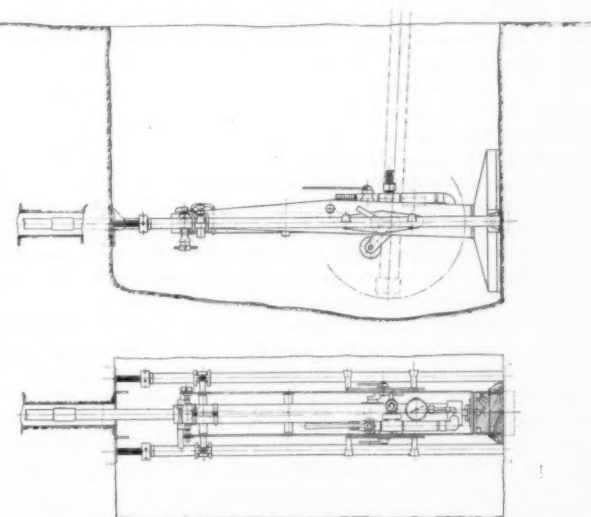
MANGNALL EARTH THRUST BORER—SIDE ELEVATION AND PLAN VIEW
